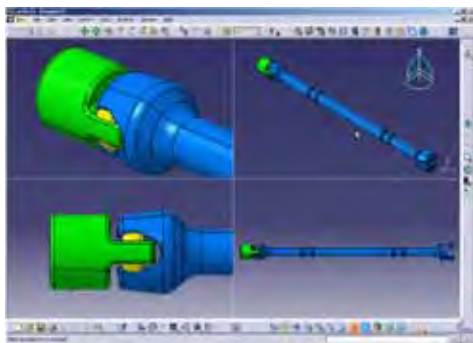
Configuration design of top spindle, end coupling and slipper metal using CATIA
